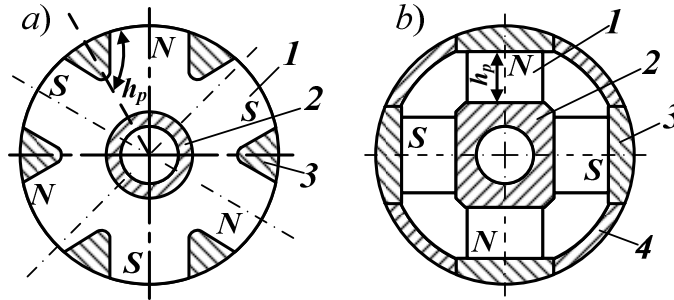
Star-shaped rotors: a - without pole shoes, b – assembled with pole shoes
